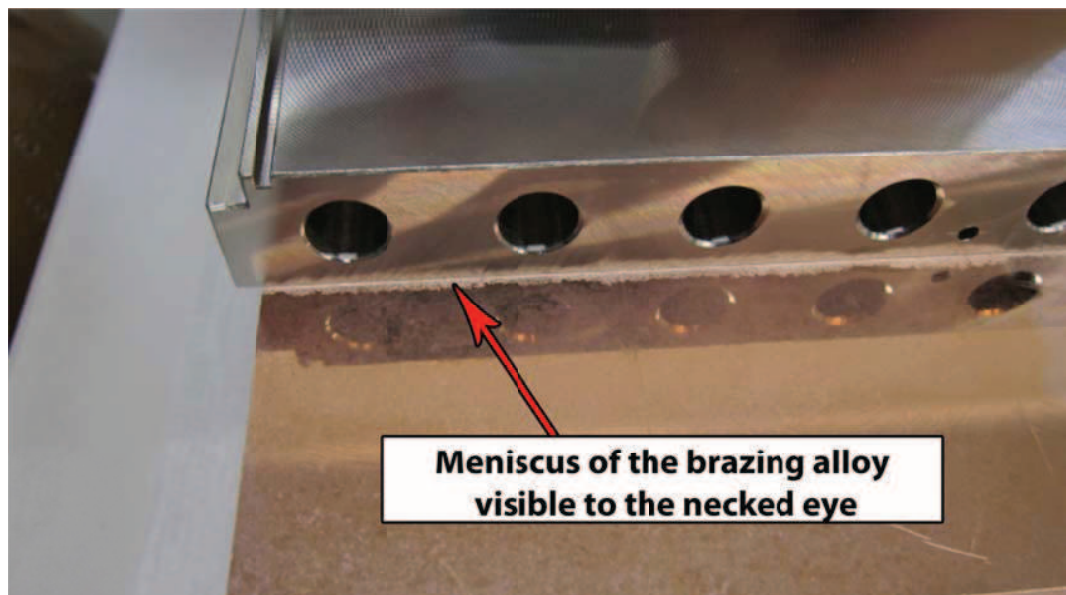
Detail of the copper-stainless steel flange brazed joint
